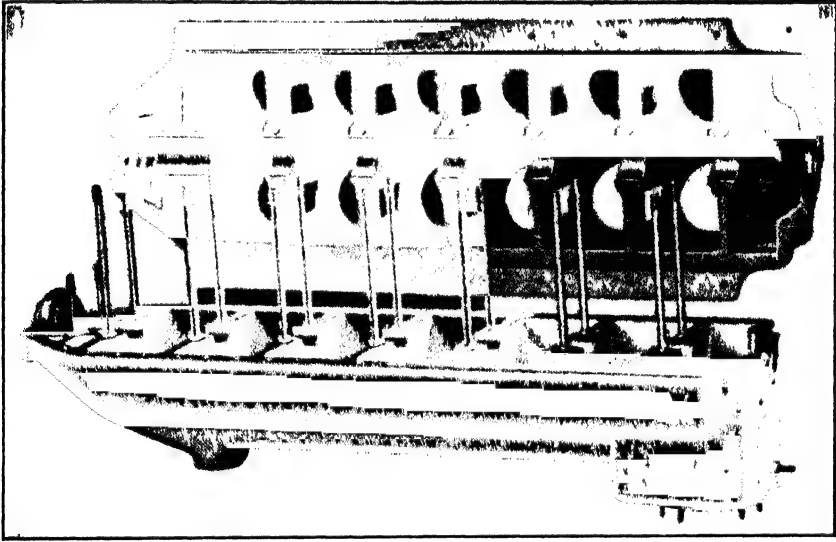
Illustration Showing Method of Construction of the Liberty Engine Crankcase. Note Method of Fastening Upper and Lower Halves Together by the Use of Long Through Bolts Extended to the Top of the Upper Crankcase, as Well as by the Numerous Smaller Bolts Holding Flanges Together.
